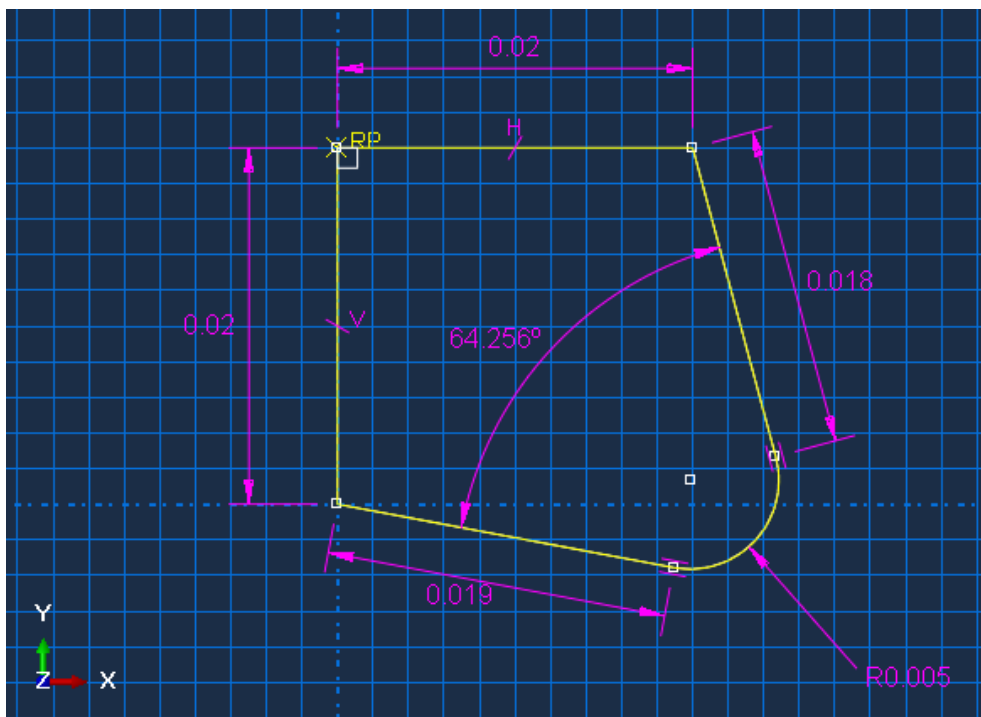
Sketch made on Abaqus of the cutting tool with edge radius $5 \mu\text{m}$. The dimensions on the sketch are in millimeters.
